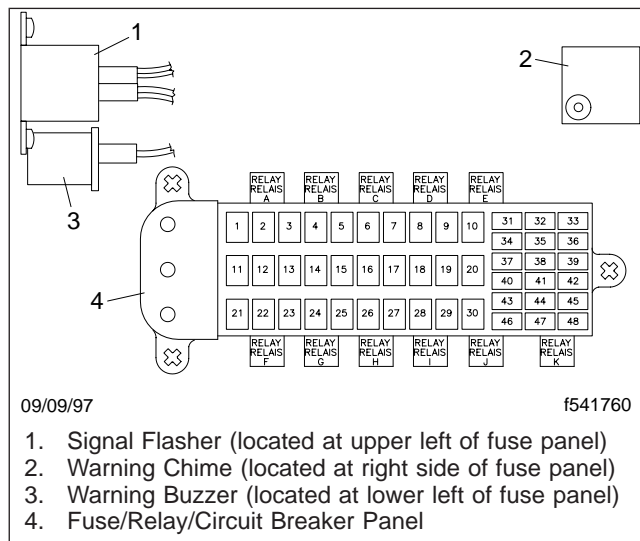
, Fuse/Relay/Circuit Breaker Identification
